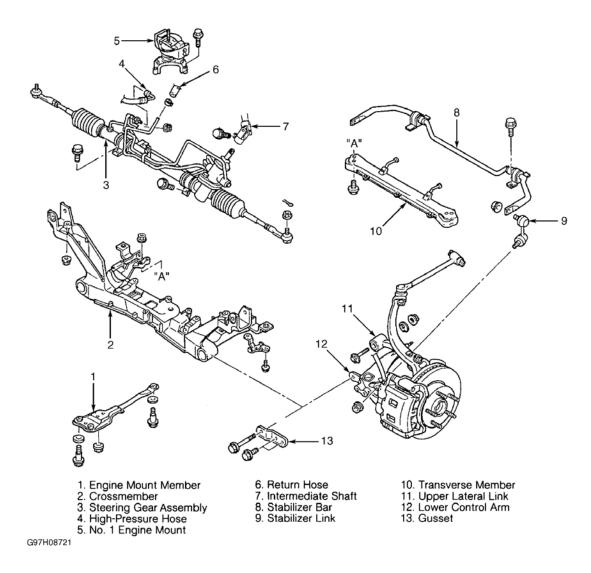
Removing Steering Gear Assembly (Millenia) Courtesy of MAZDA MOTORS CORP.
